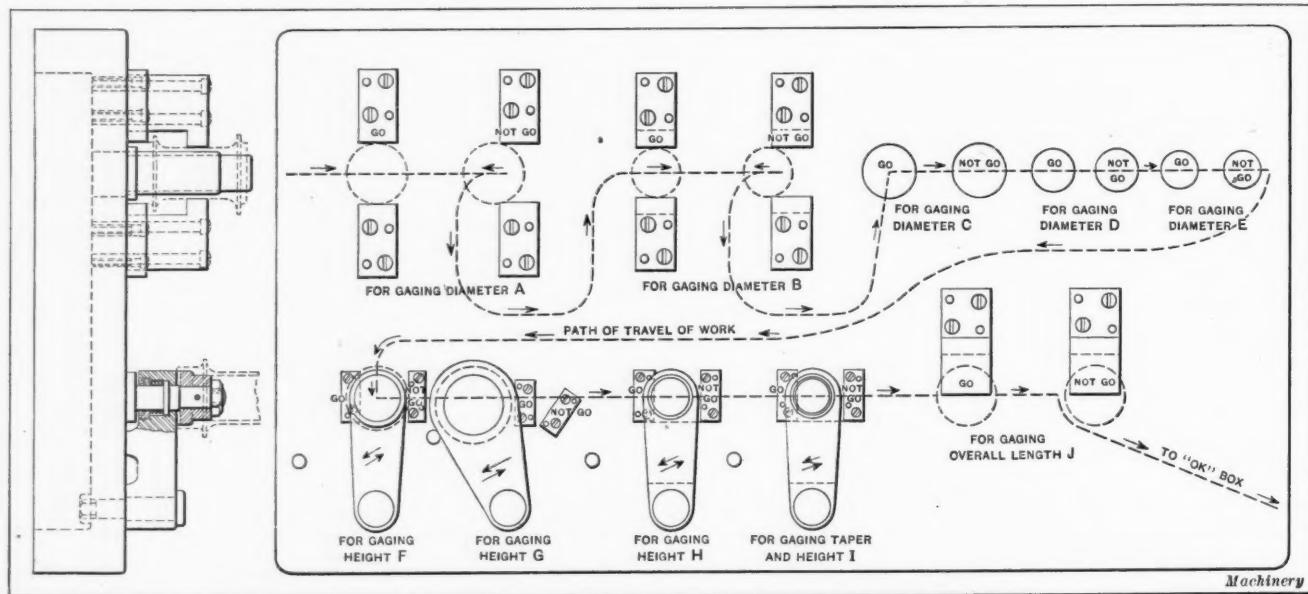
Progressive Type of Gage particularly adapted for inspecting Screw Machine Products
